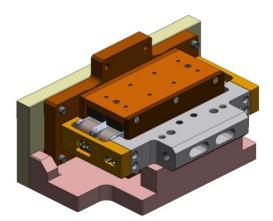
Install Actuator in Set-Up Fixture. Field Assembly is now located, to be followed by Bobbin.
